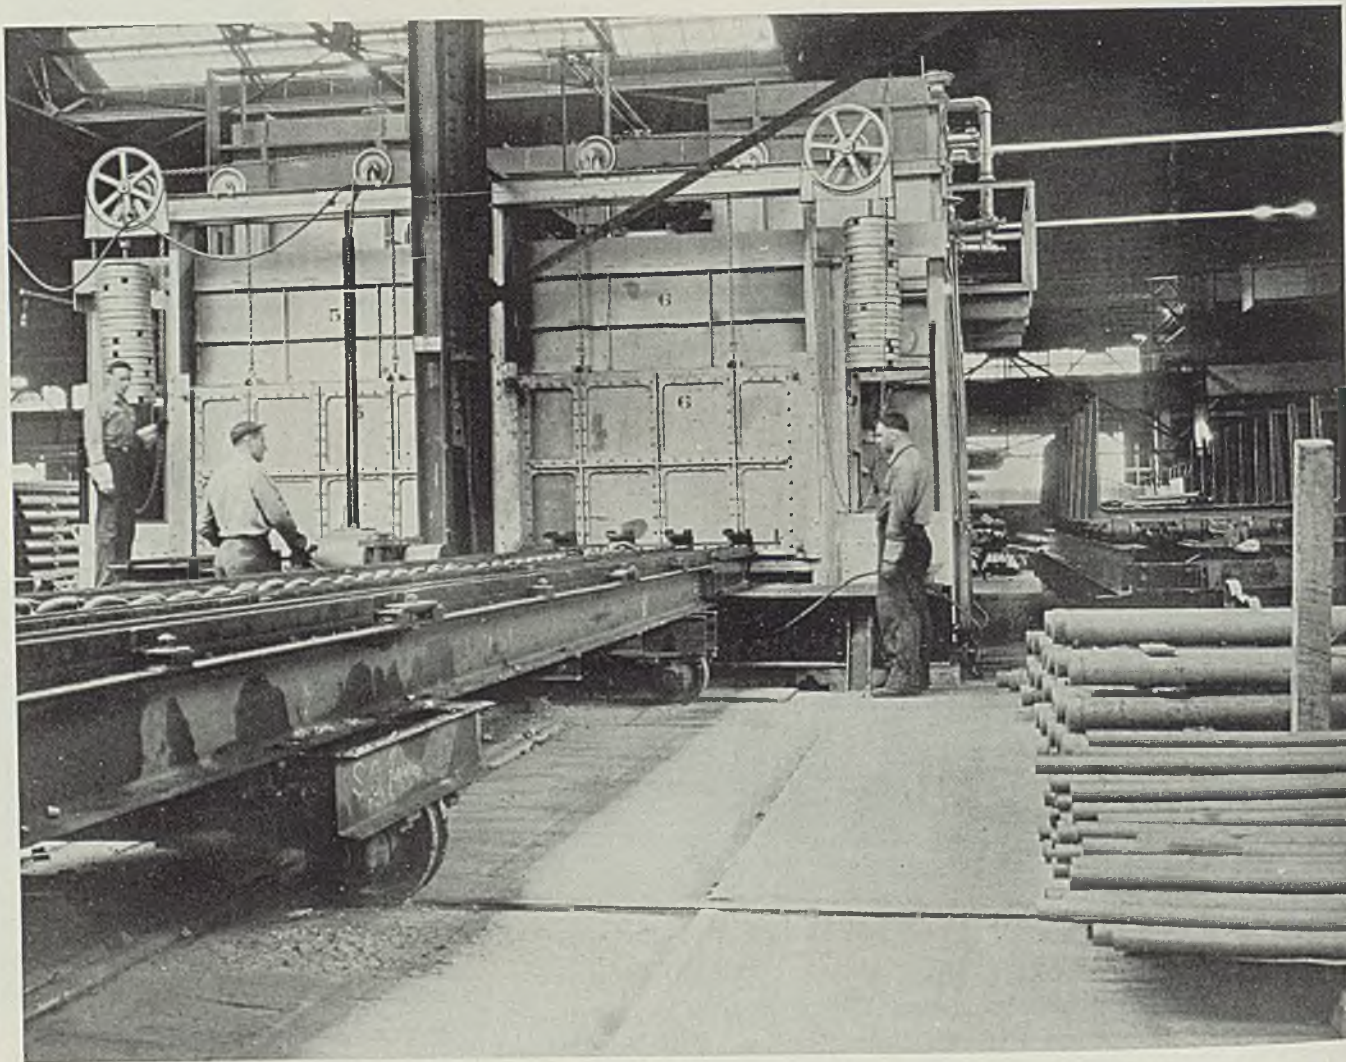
Front view of furnaces showing charging table in position to remove a loaded cradle and empty cradle on loading station at right of furnace
